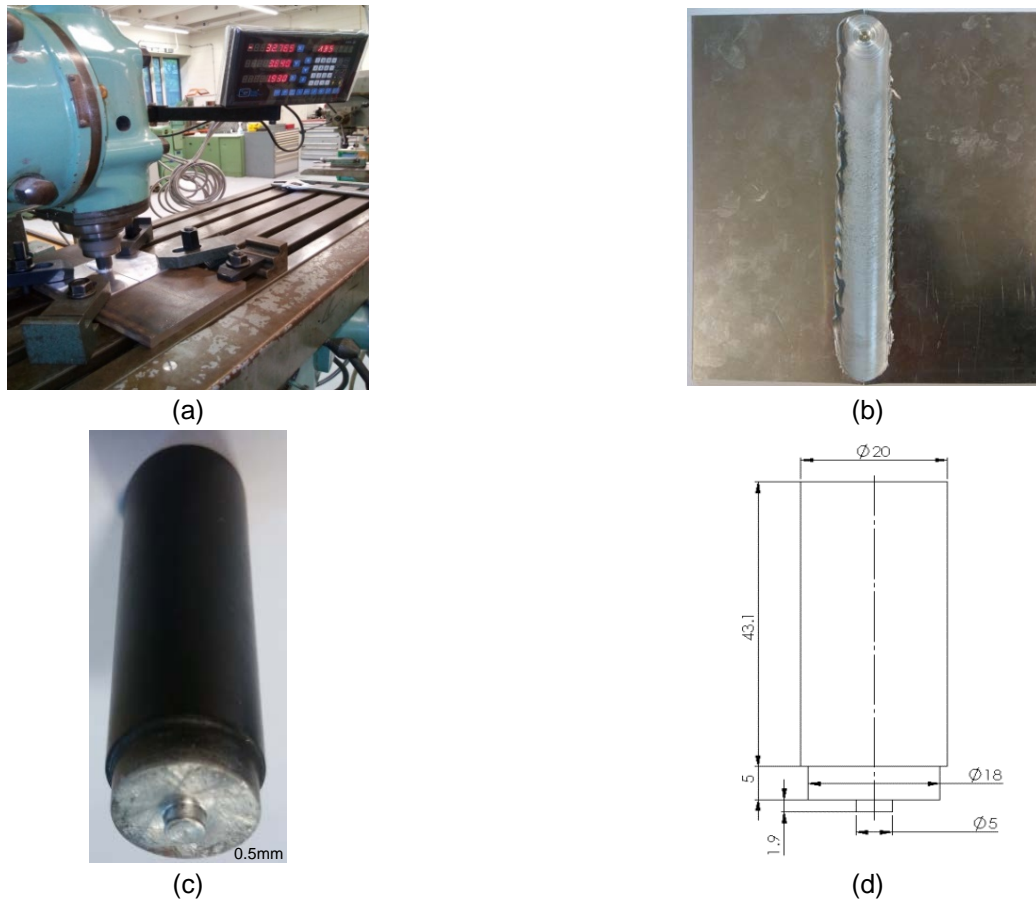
Friction stir welding process: a) Milling machine with the tool mounted and the alloy plates clamped in place, b) Appearance of a fresh friction stir weld, c) The welding tool, d) Tool dimensions
